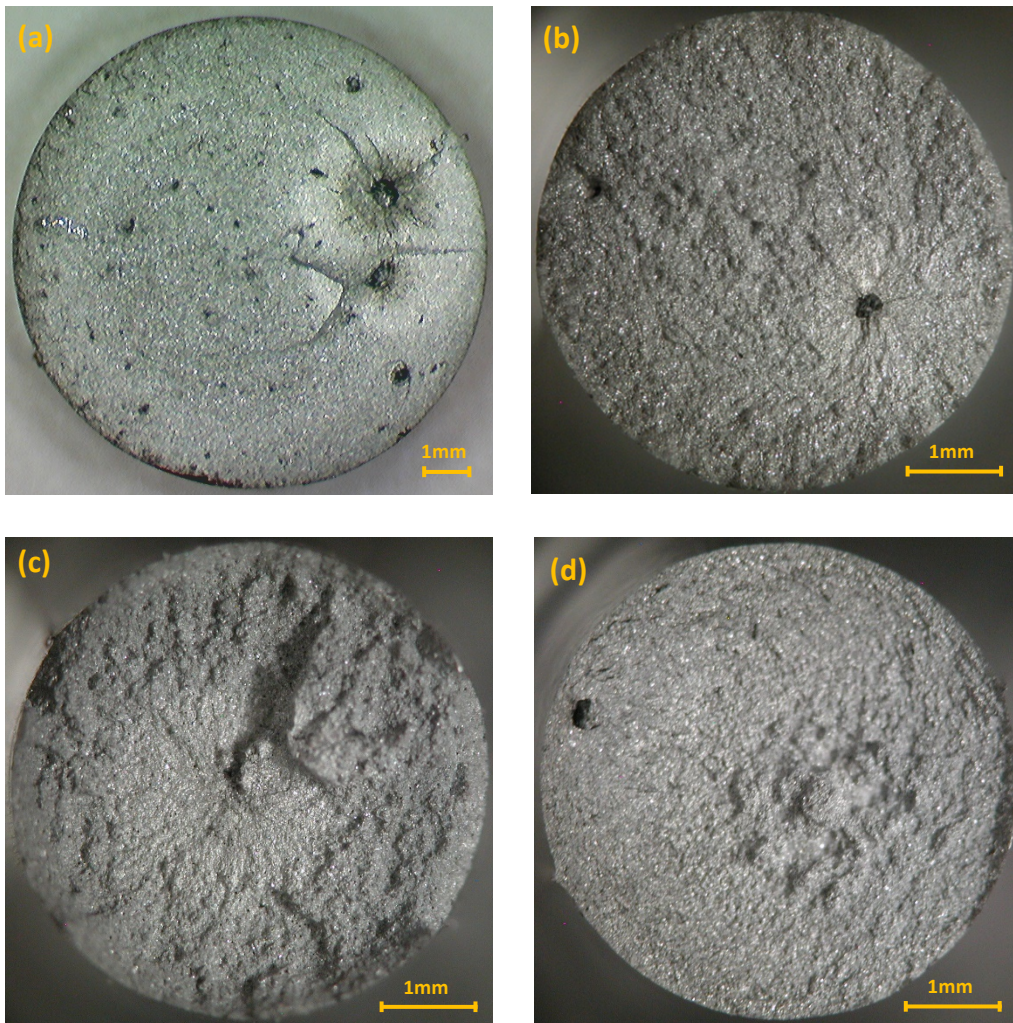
Typical fracture surfaces of the specimens failed under different loading conditions; (a) large and (b) small specimens under fully-reversed axial loading, (c) small specimen under axial loading ($R = 0$), and (d) small specimen under rotating bending condition.
